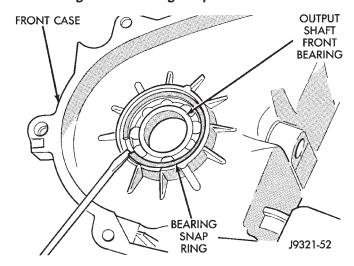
Removing Output Shaft Front Bearing Snap Ring
